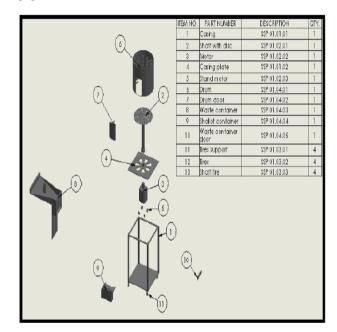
Exploded view of Shallots Skin Peeler Machine
